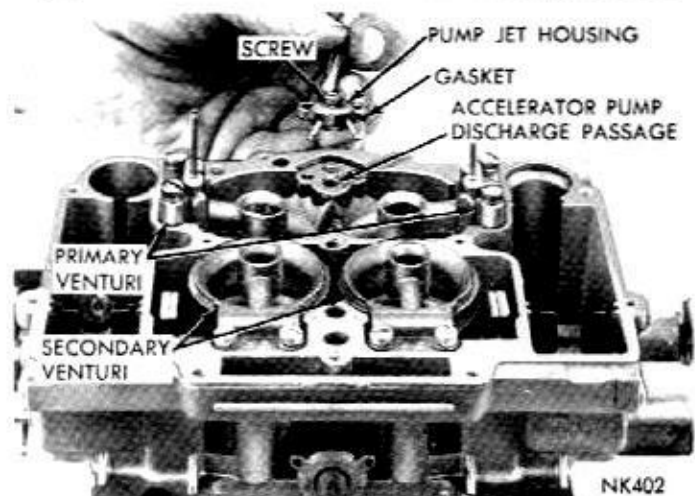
Removing or Installing Accelerator Pump Jet Housing
